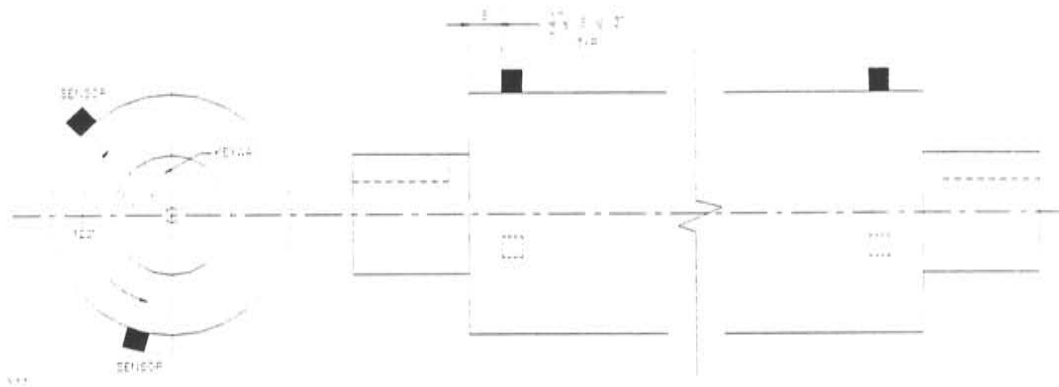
SENSOR LOCATIONS ON CRANE SHAFT
